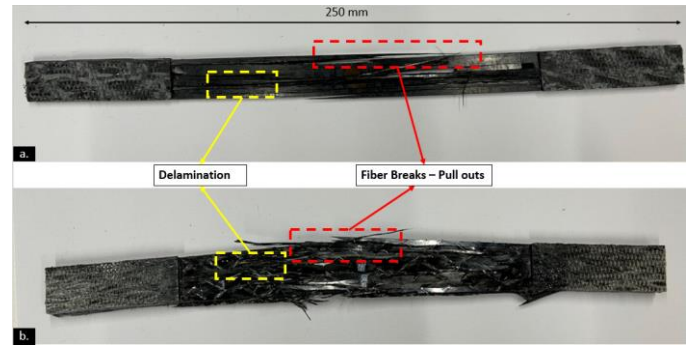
(a) Group -1 Tested Tensile Test Specimen, (b) Group -2 Tested Tensile Test Specimen
